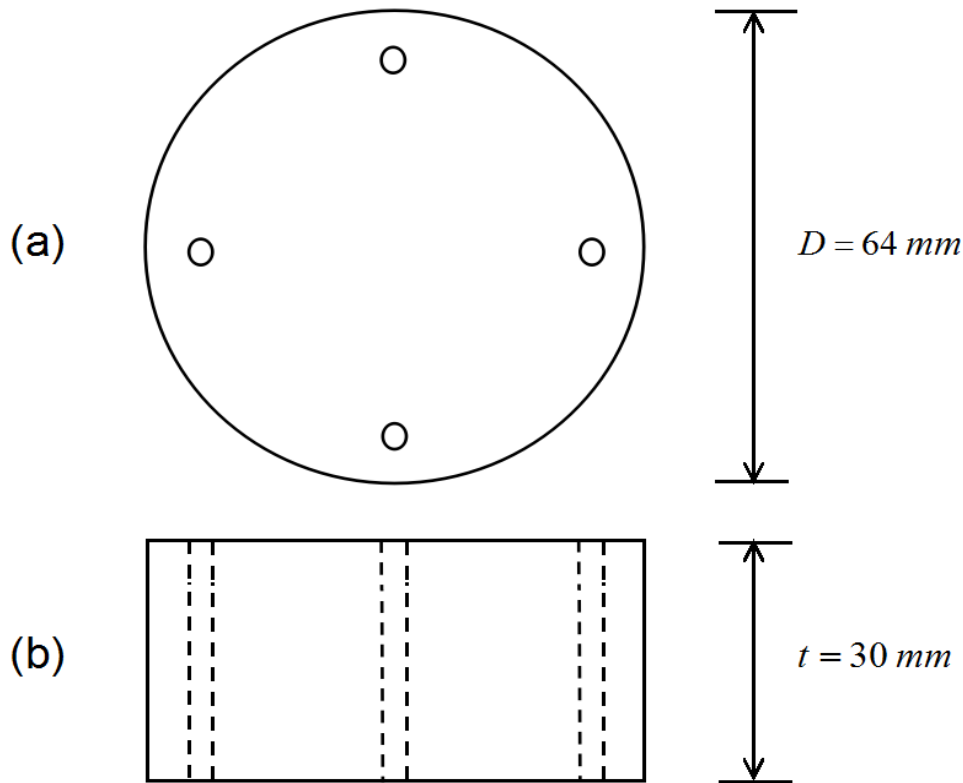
Design aspects of head expander: (a) top view, (b) front view. The dashed lines in the front view represent the through-hole drilled in the head expander (four holes in the top view), for fastening it on the armature of the shaker.
